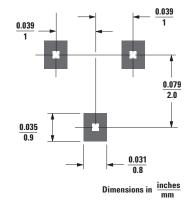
Recommended PCB Pad Layout for Avago's SOT-23 Products.
